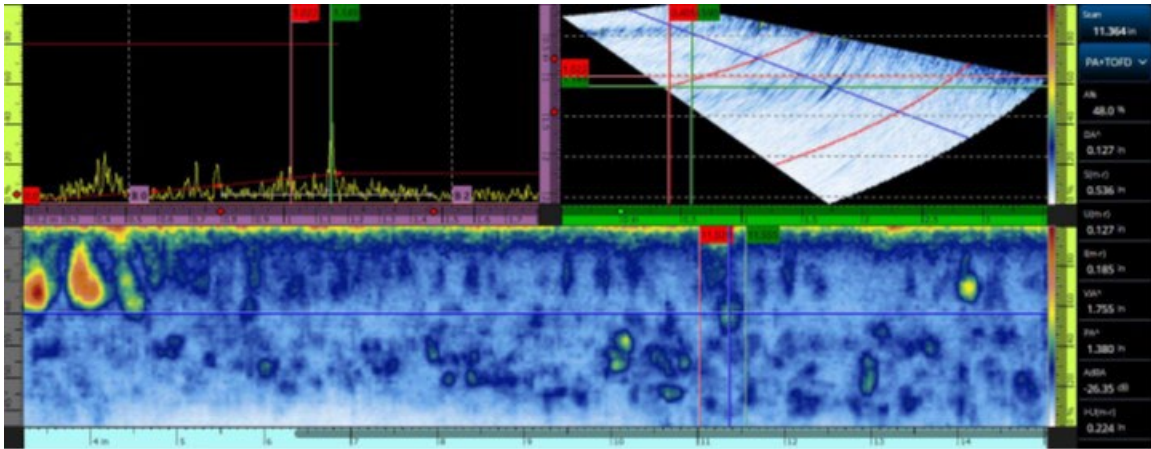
PAUT indication of defect at Location B in fillet weld test panel MGL-3 from OD-raster scan
